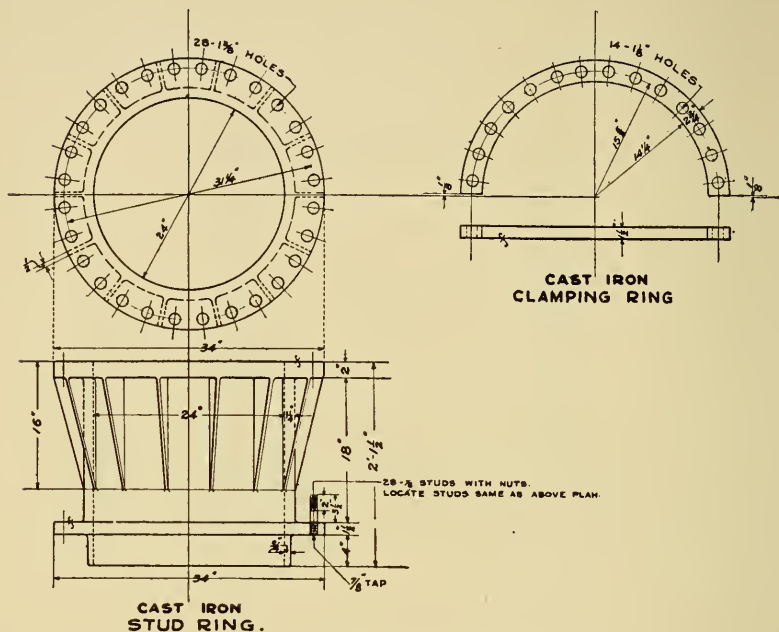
DETAIL OF CASTINGS FOR WATERPROOFING HYDRAULIC ELEVATOR PITS AT PLUNGER CYLINDER.
